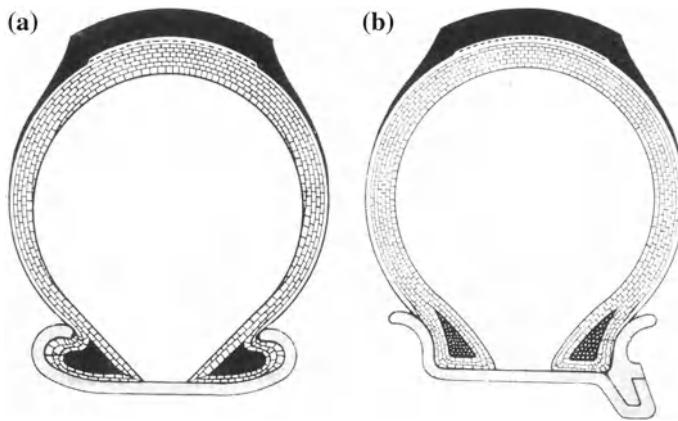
According to the Bartlett's patent, the steel cable could be avoided with a suitable shape of the bead, matching with the wheel rim (redrawn from Tompkins 1981)
